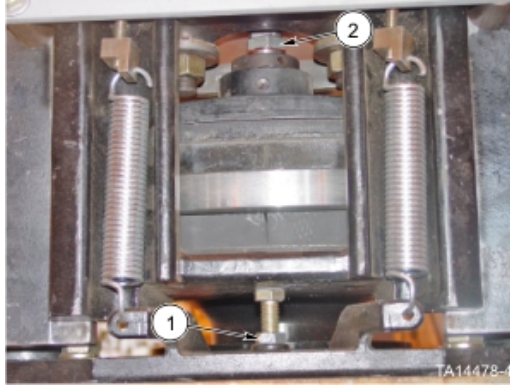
Positioning of pipe clamp for adjustment of torque tube
